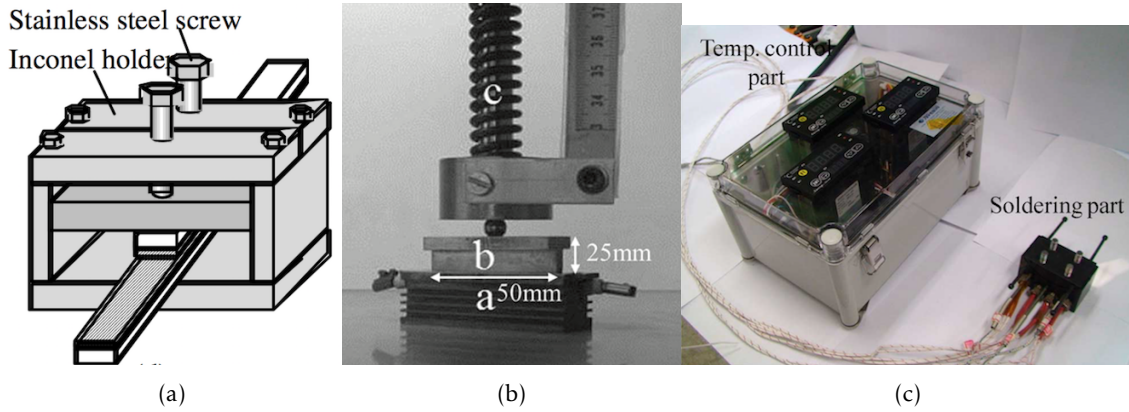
Different kinds of soldering devices used to make joints: (a) Schematic of a holder device, adapted from Kato-Yoshioka et al. (2006); (b) A soldering device, adapted from Bagrets et al. (2015); (c) A soldering machine with real-time temperature control, adapted from Ki Sung Chang et al. (2010).
